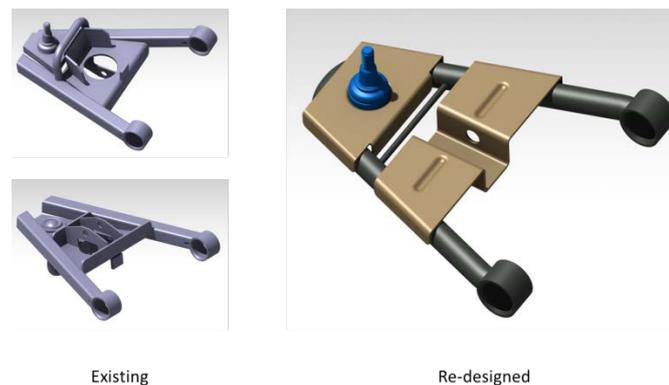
Redesign for Assembly (DFA) of Suspension Control Arm
